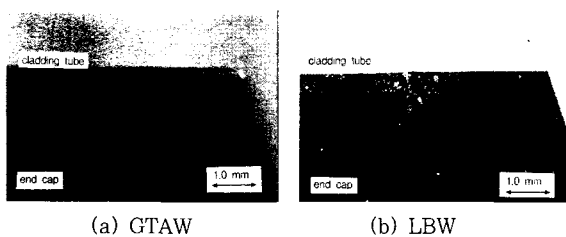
Cross sectional views by remote welding performance. ($\times 20$)
